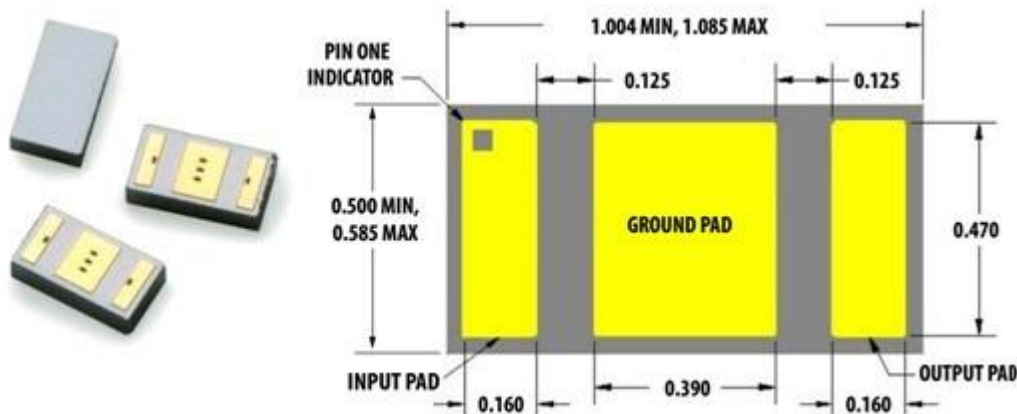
Photo of the WLP0402 package and its outline, all units are in millimetre.
